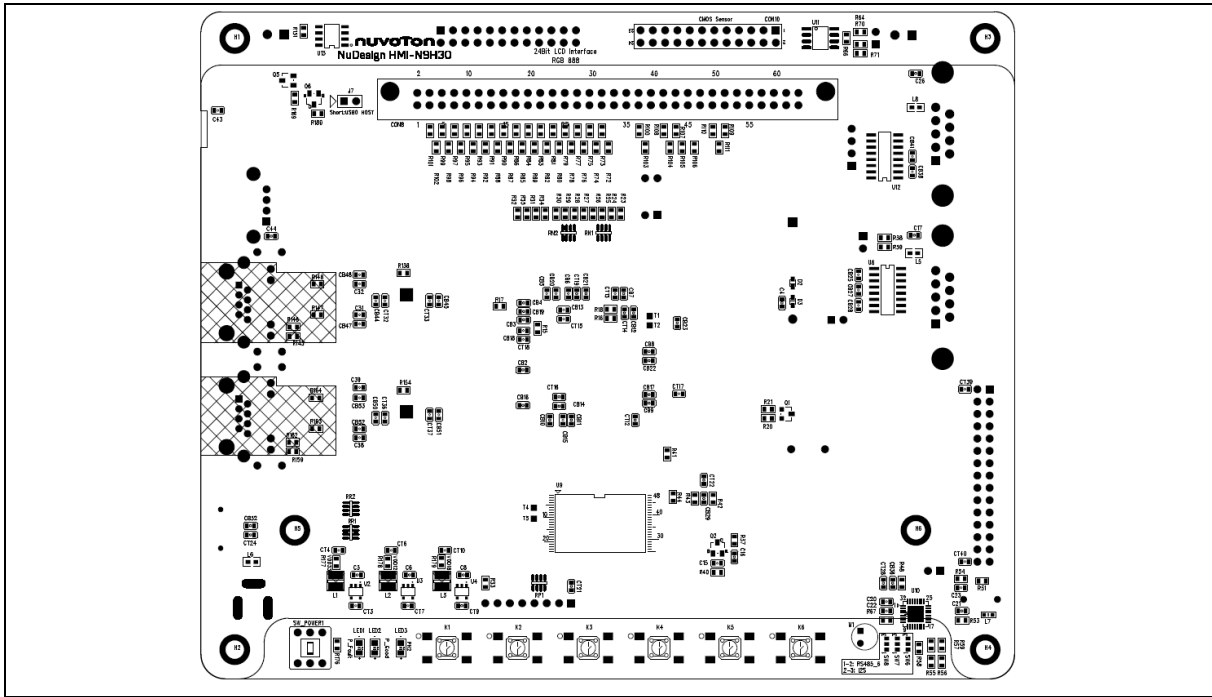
Front View of NuMaker-N9H30 PCB Placement
